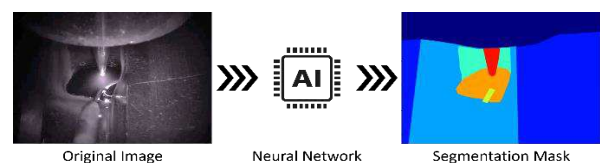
Exemplary semantic segmentation of a TIG welding image.
